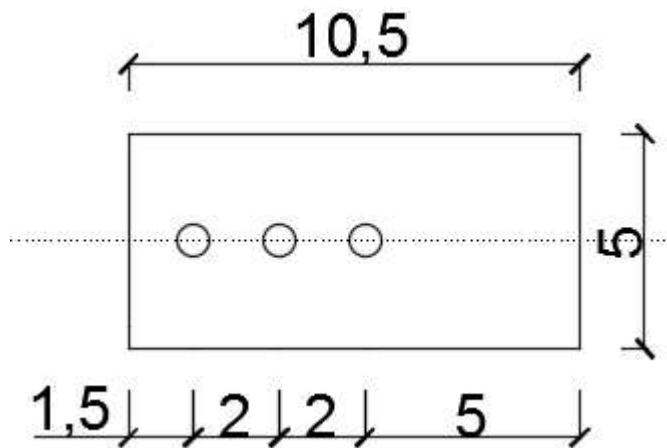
Branch plate welded to the 16" tube (weld on the right)
